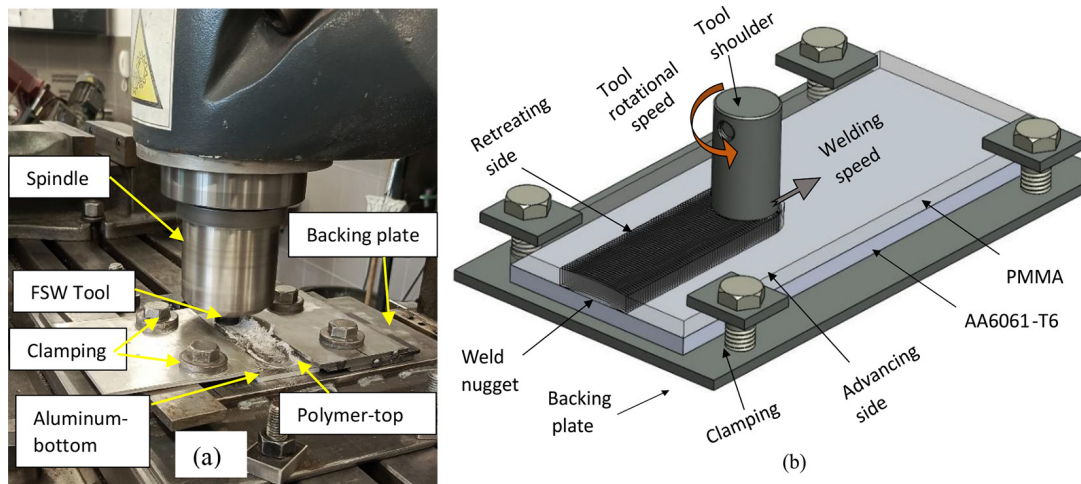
Clamping fixtures: a) FSW experimental setup, b) schematic illustration of AA6061-T6 and PMMA FSW process
